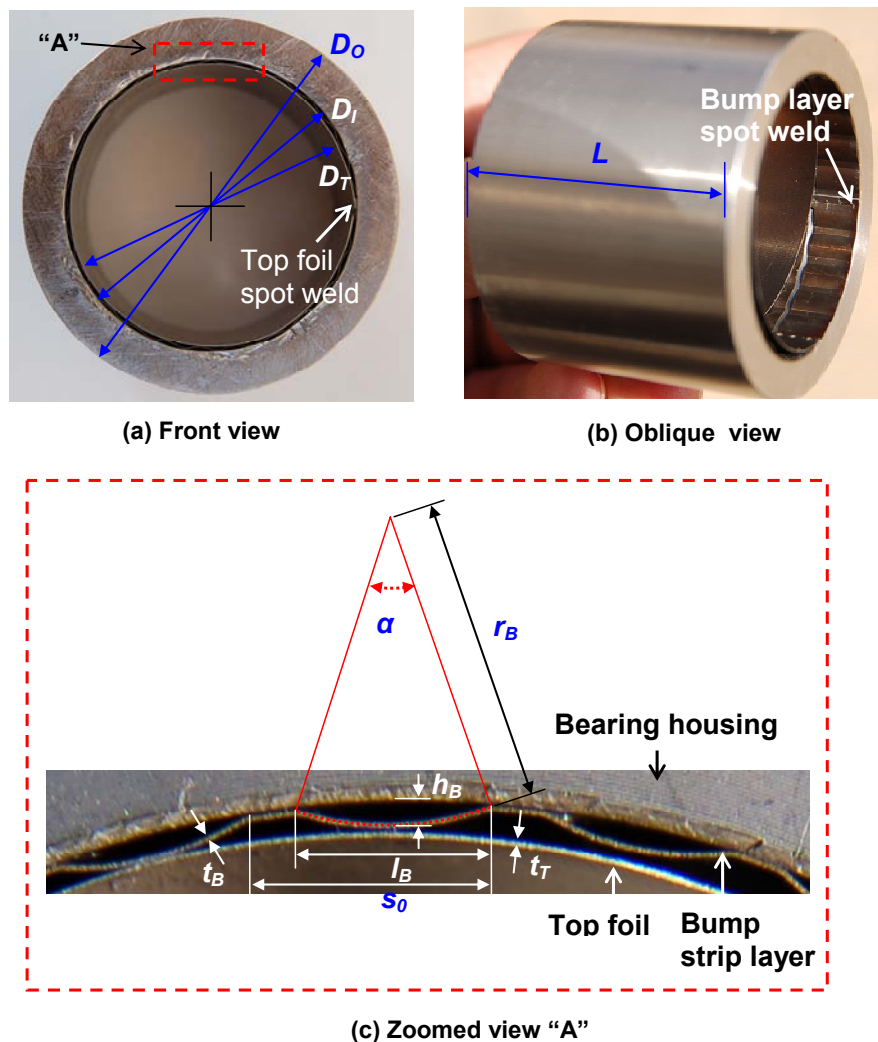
Repaired Foster Miller foil gas bearing and its dimensions
